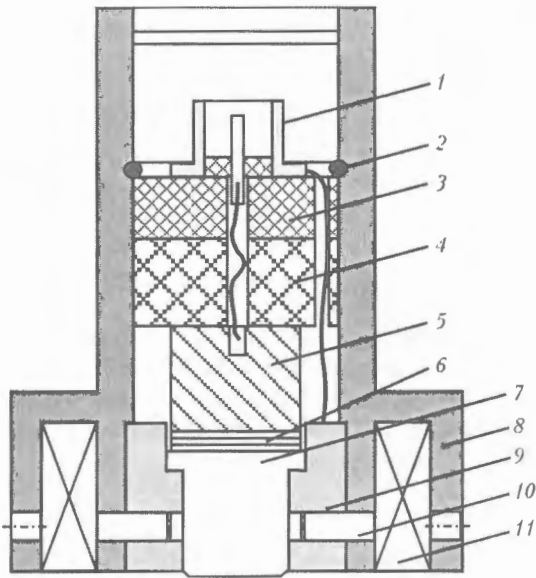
Schematic of a sectional view of the transducer for fixation of oscillations of the weld pool: 1 – connector; 2 – stopper; 3 – cover; 4 – spring; 5 – seismic mass; 6 – piezoelectric element; 7 – wave guide; 8 – casing; 9 – support; 10 – pin; 11 – winding
